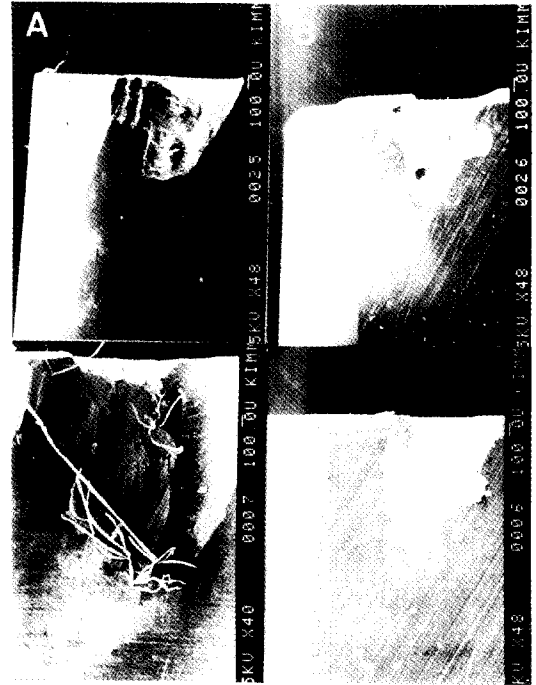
SEM micrographs of the cutting edge of the tool worn during cutting Inconel 718; (a) GA, (b) HA, (c) HB and (d) HC tool tested on NC lathe, cutting speed: 450 m/min, feed: 0.1 mm/rev., depth of cut: 1.5 mm.
